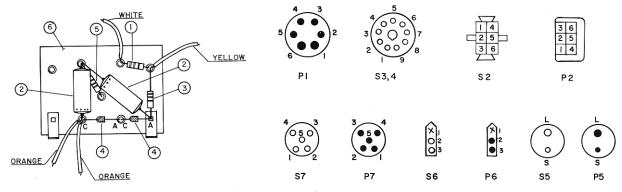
Parts and Wiring, 037432 Rectifier Assembly
